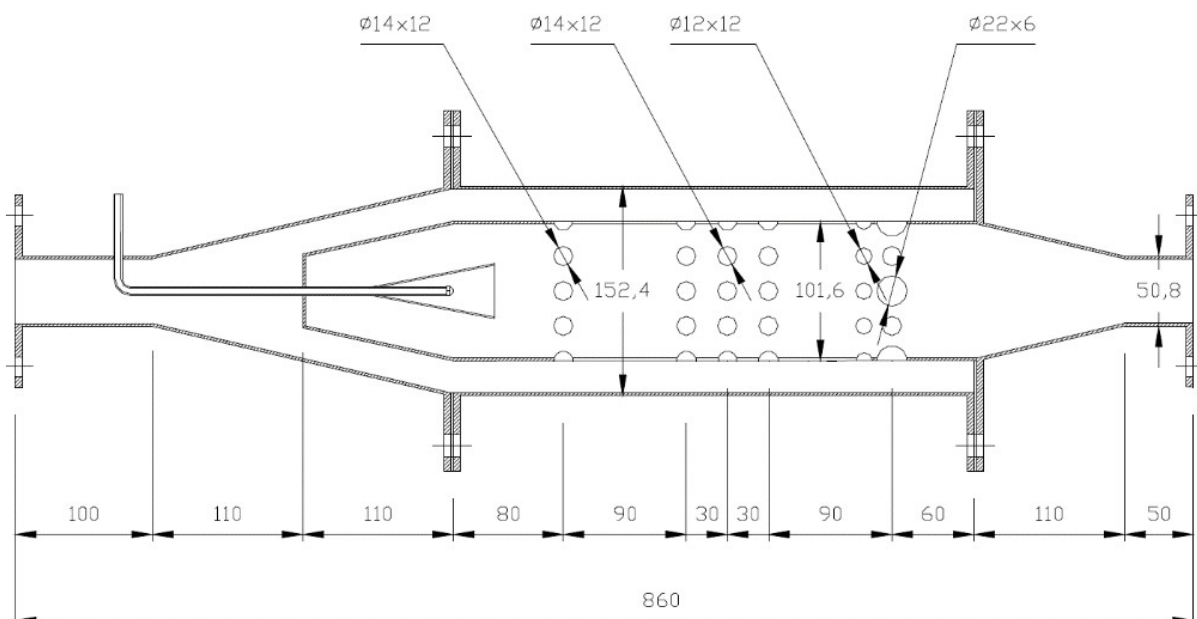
Tubular combustion chamber (dimensions in millimeters)
